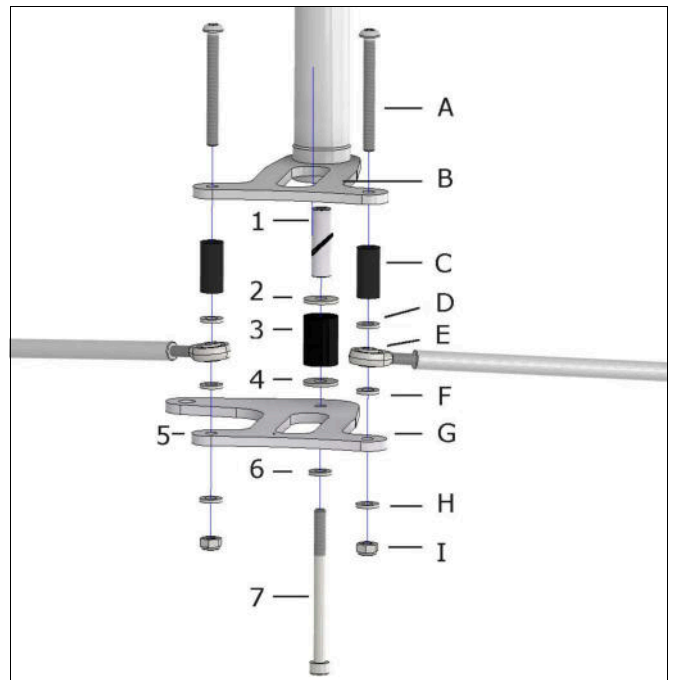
Gekko 26: Part order for mounting the stem adapter to the lower stem.
